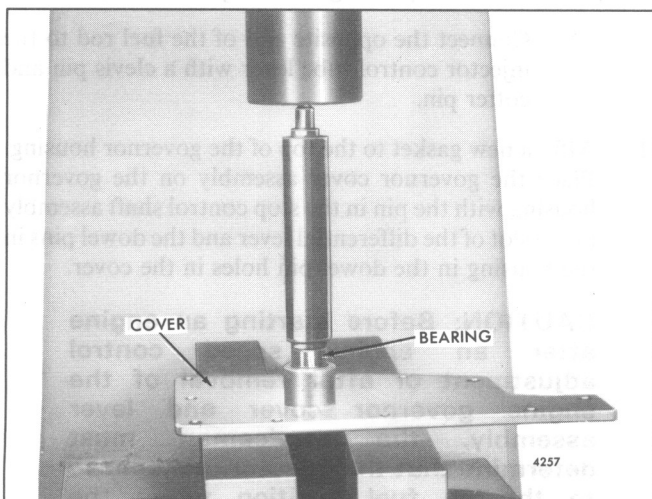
Installing Bearings in Governor Cover using Tool J 21068
